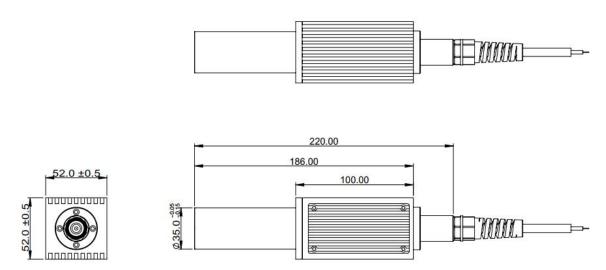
YDFLP-E-80&100-M7-M-R Standard Output Head Dimensions (Unit: mm)
